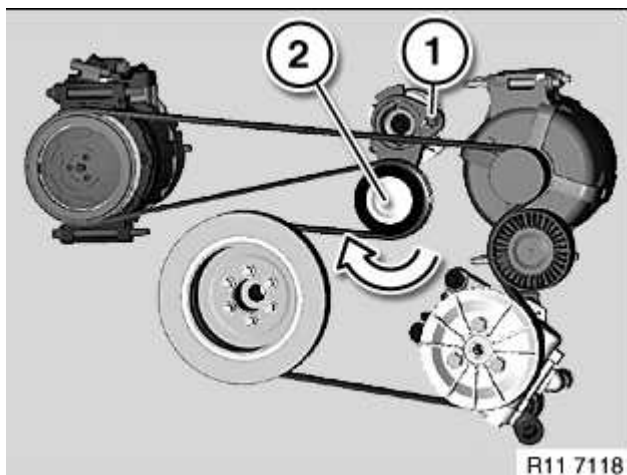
Drive Belt Tensioner, Mounting Screw And Removal Direction
